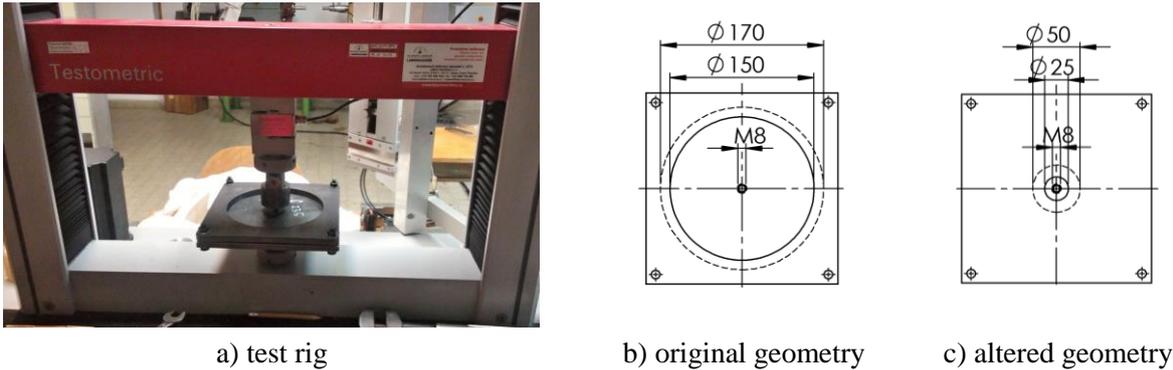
The tensile testing device with the interface for a clamped specimen.
